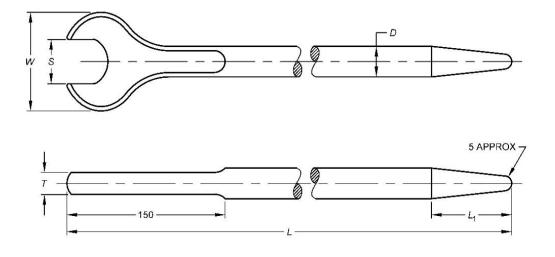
DIMENSIONS OF TRACK SPANNERS FOR RAILWAYS
